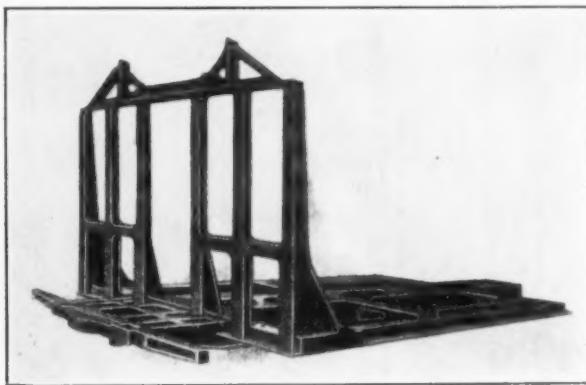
INTEGRAL STEEL CASTING USED IN END FRAME CONSTRUCTION
